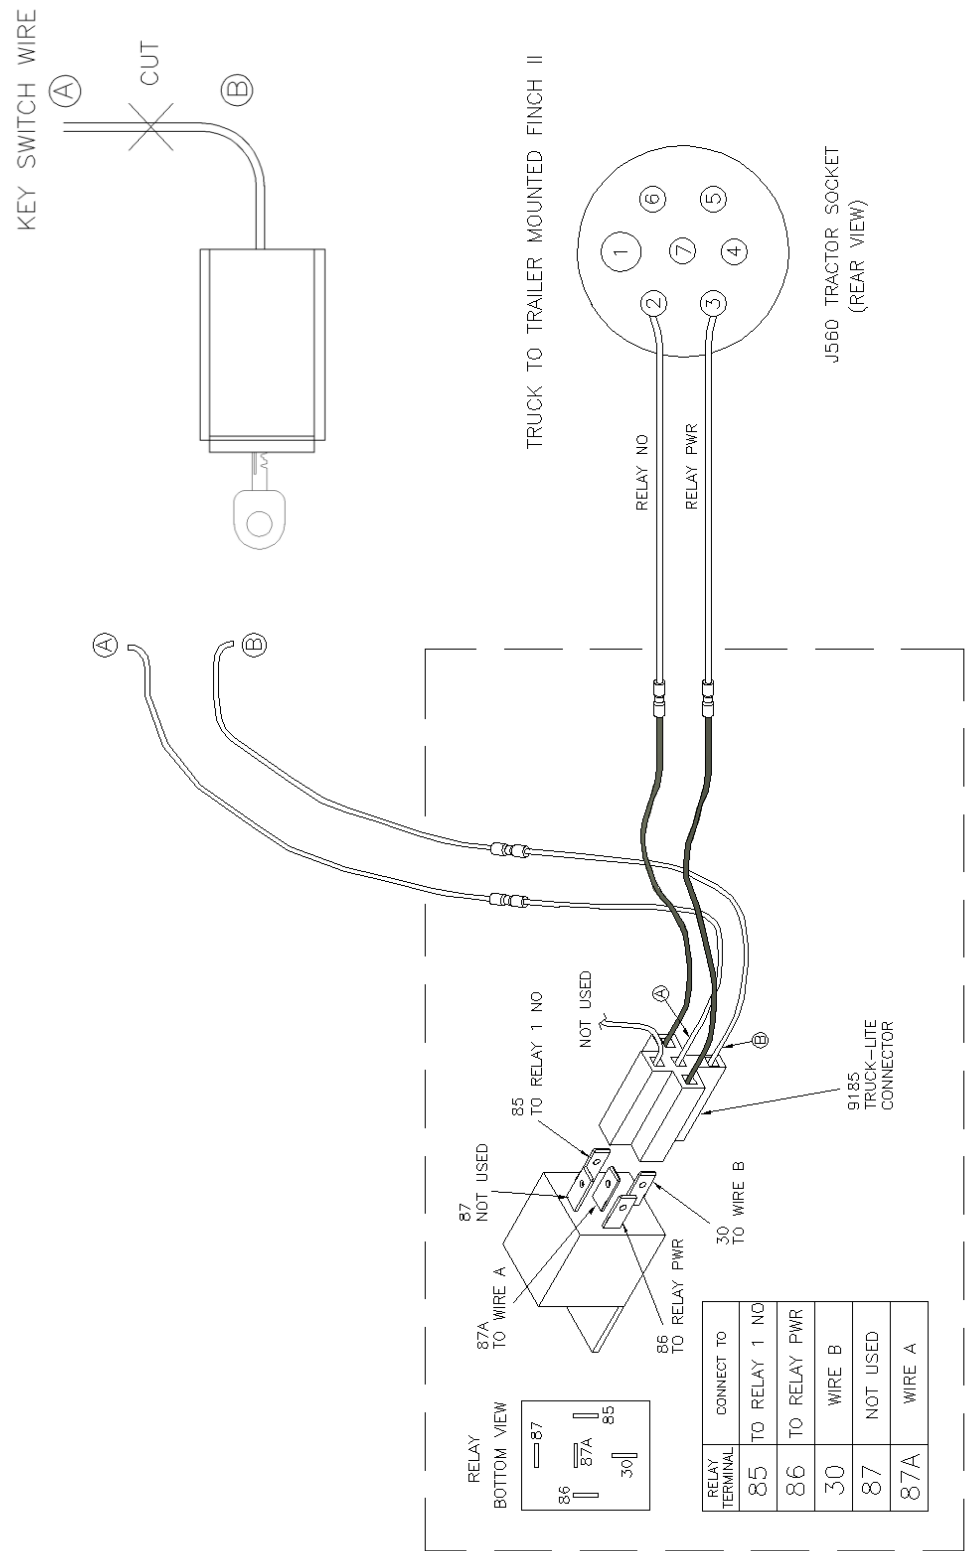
Tractor-Trailer Engine Kill Relay Wiring Detail
